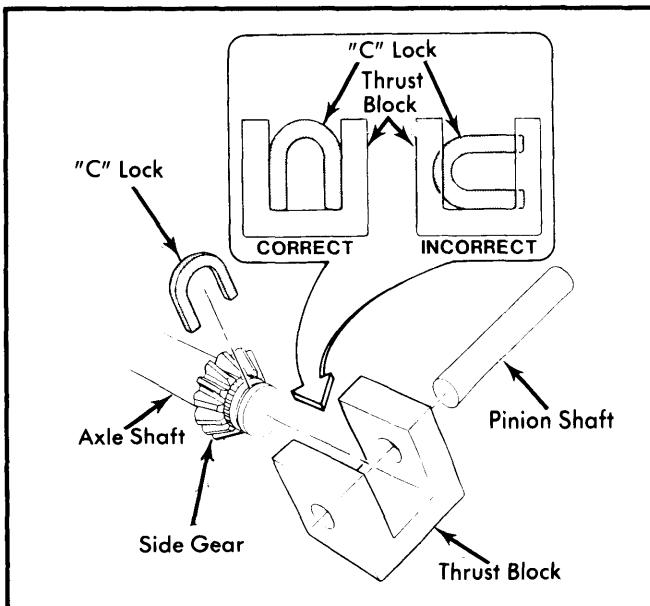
View Showing Correct Positioning of "C" Lock for Removal
